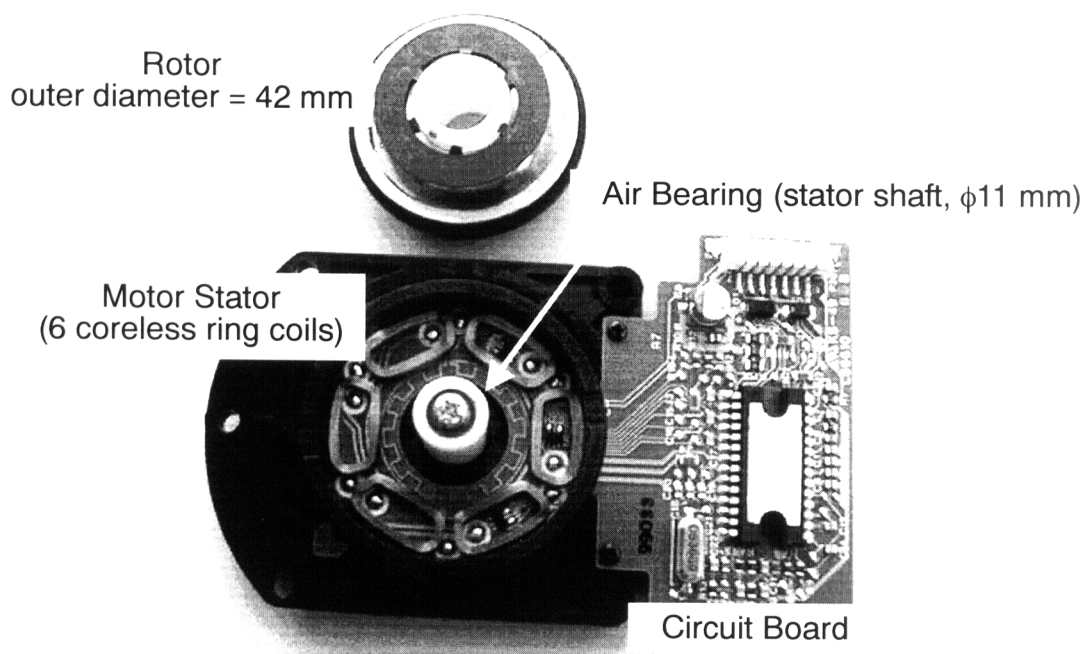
Polygonal mirror scanner motor. The rotor (upper) is disassembled from the stator (lower).
